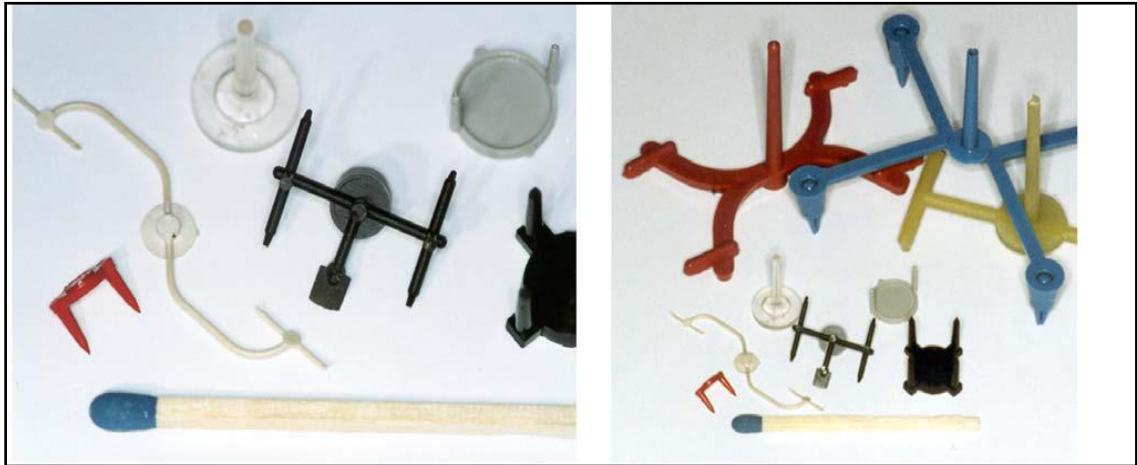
Comparison of runner systems to mold micro part with conventional injection molding machines (right) and with micro injection molding machine (left)
